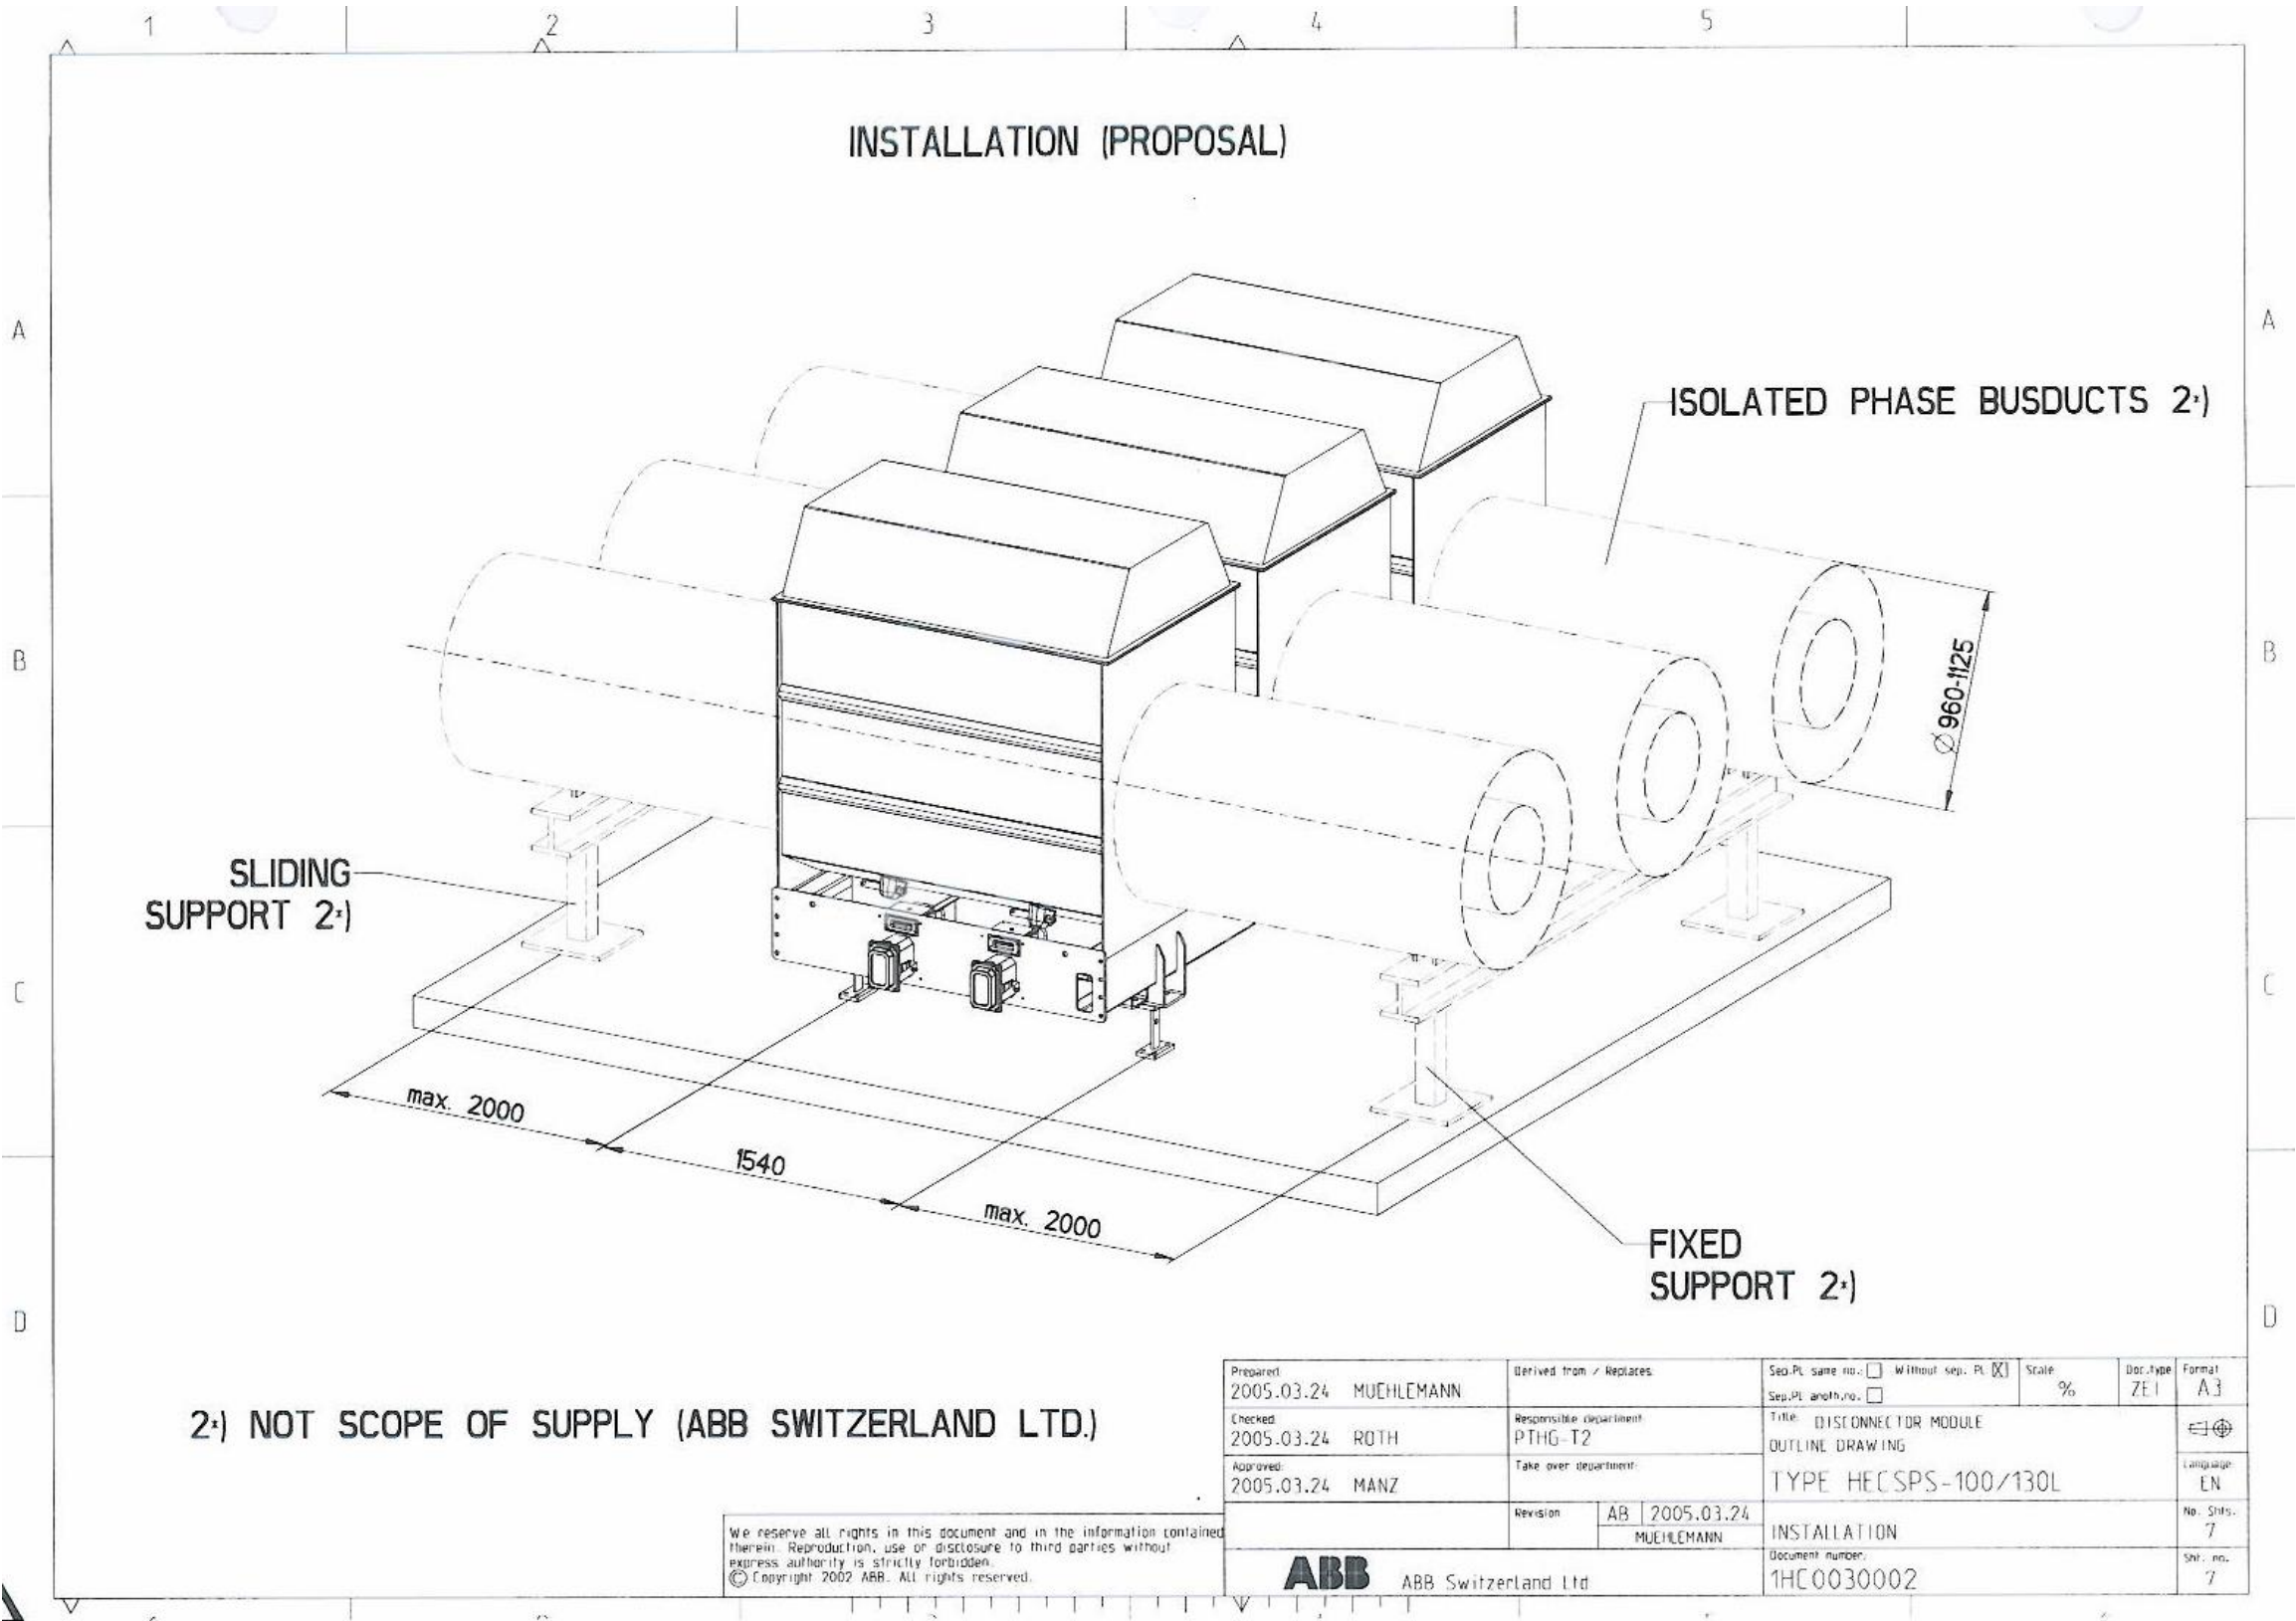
Toshiba Typical Supply ABB Type HECPS-100/130L, Drawing 1HC0030002, Sheet 7 of 7
